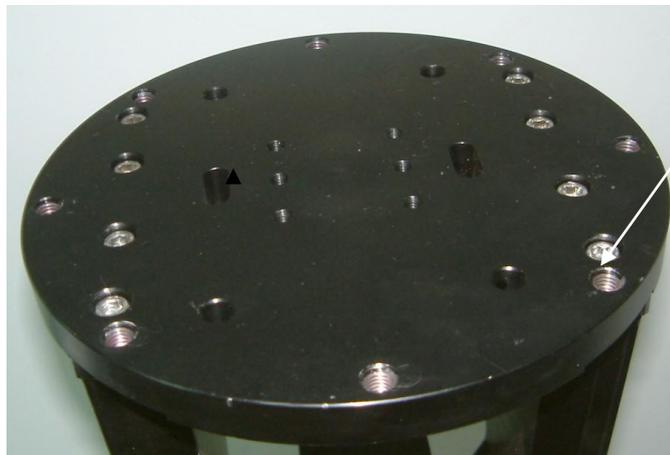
Positioner's Upper Mounting Plate – Circular Dish Support (8 holes)
